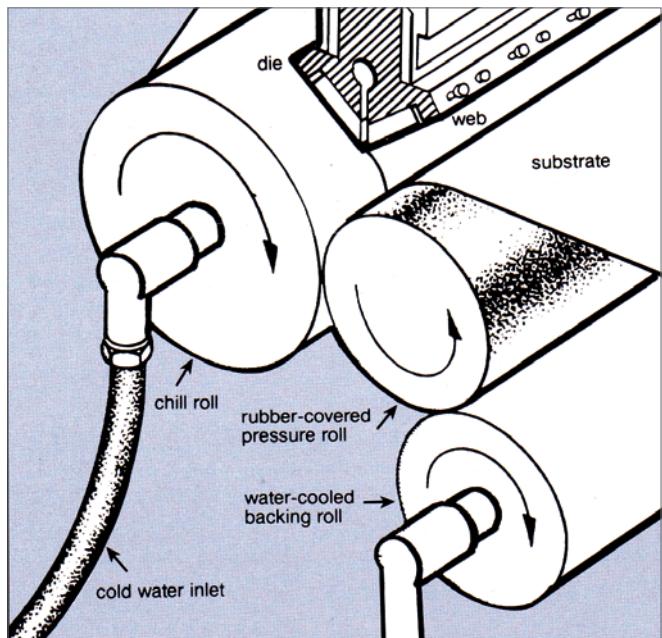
Typical Extrusion Coating Nip Roll Assembly
